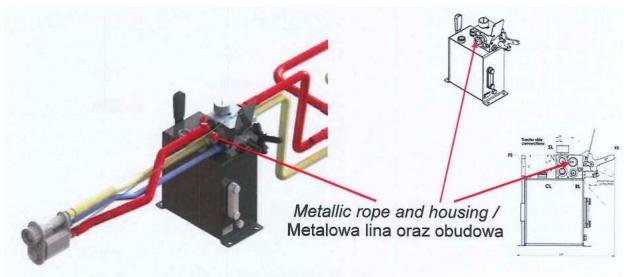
Marking where the metal cable is connected to its dedicated housing.
